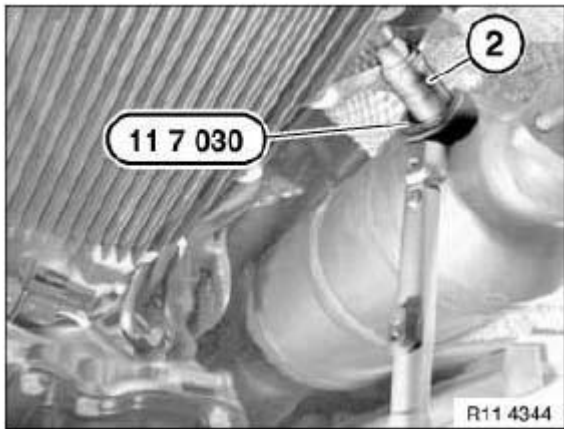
Identifying Special Tool (11 7 030) On Monitor Sensor
